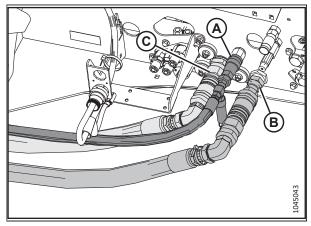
Header Drive Hydraulics – Quick Couplers
